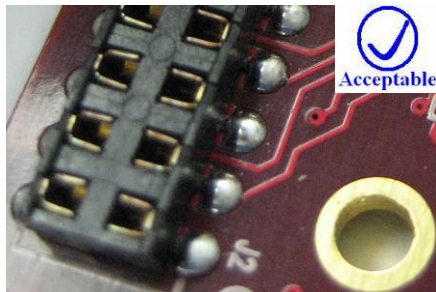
J2 soldering is acceptable 焊点可接受
